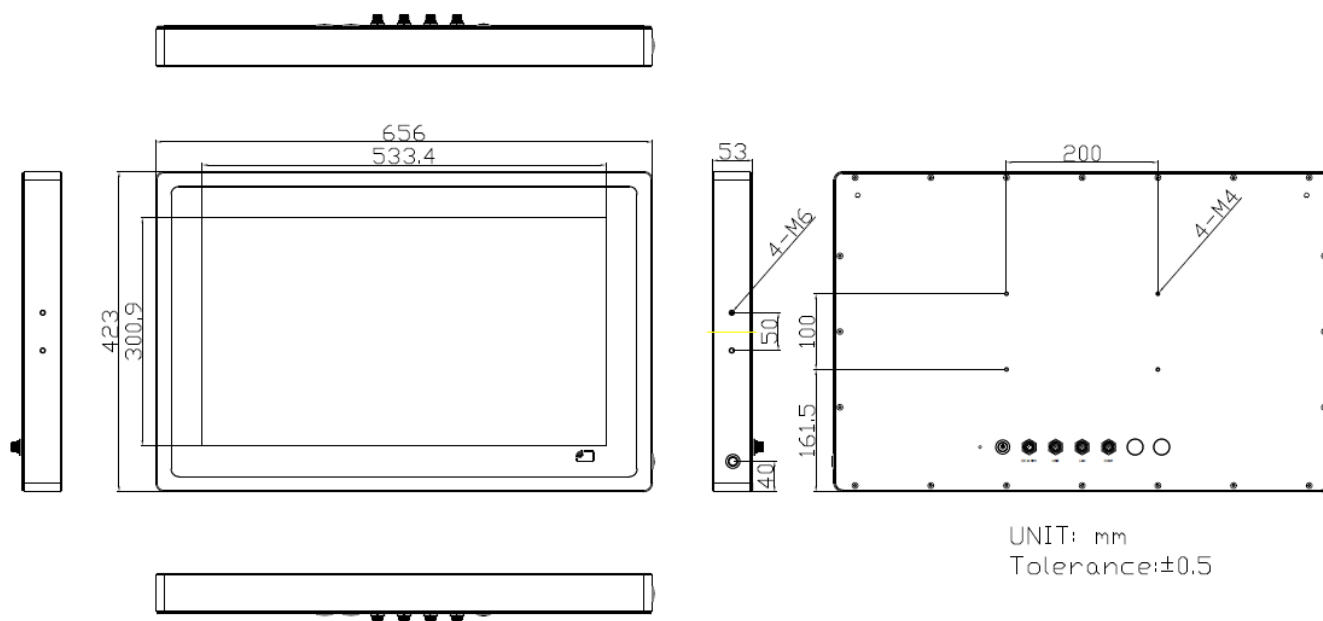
3 Dimensions of VITAM-917DP/R(H)
